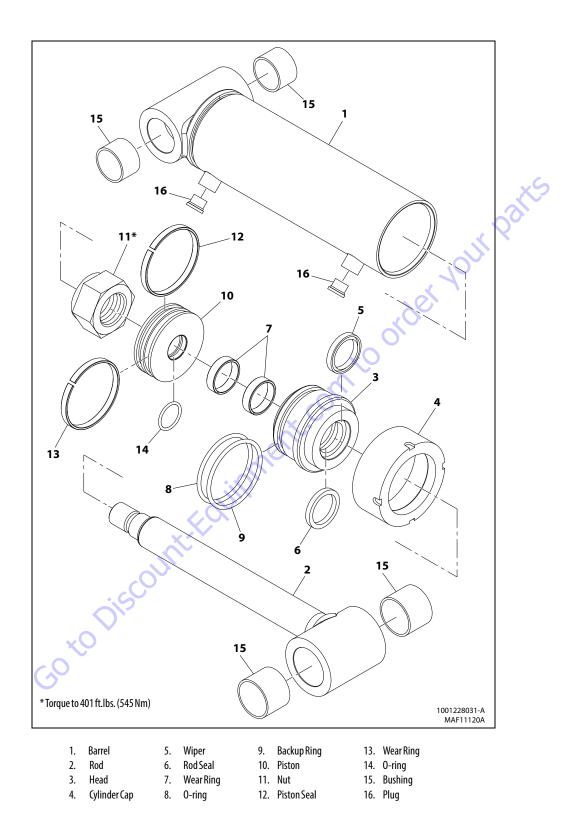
Steer Cylinder (SN 0300238018 to Present)
